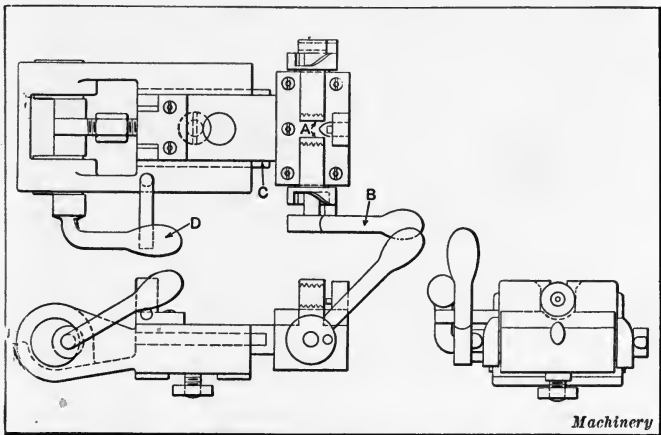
Fixture for Use in Drilling Holes on Machine shown in Fig. 1
